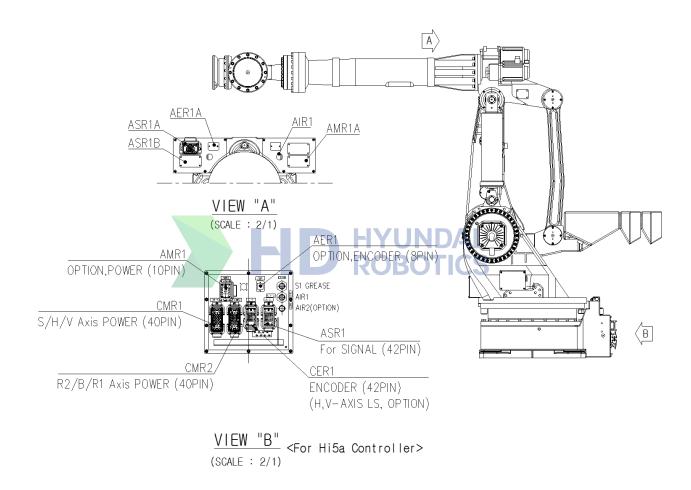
Application Wiring and Inspection Wiring Diagram
